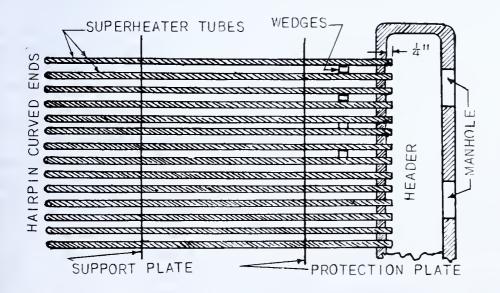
Wedges Between Tubes to Hold Them in Position Until Expanded
